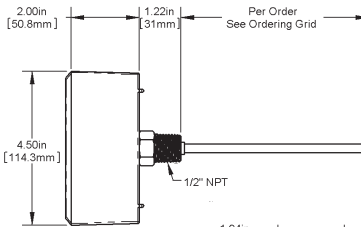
Extreme Temp Immersion with Weatherproof (WP) Enclosure, Standard Mount
